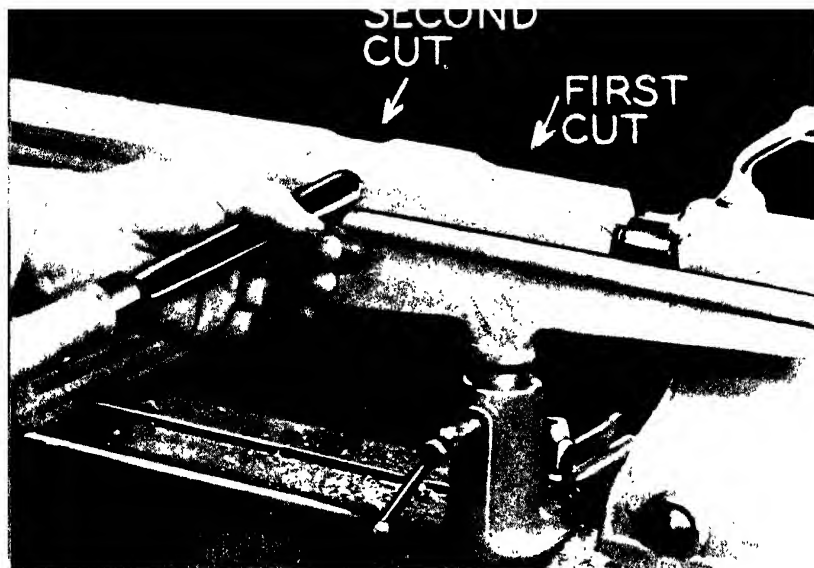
(*above*) Method of holding a tool in rounding a cylinder. Note the gouge on its side.
